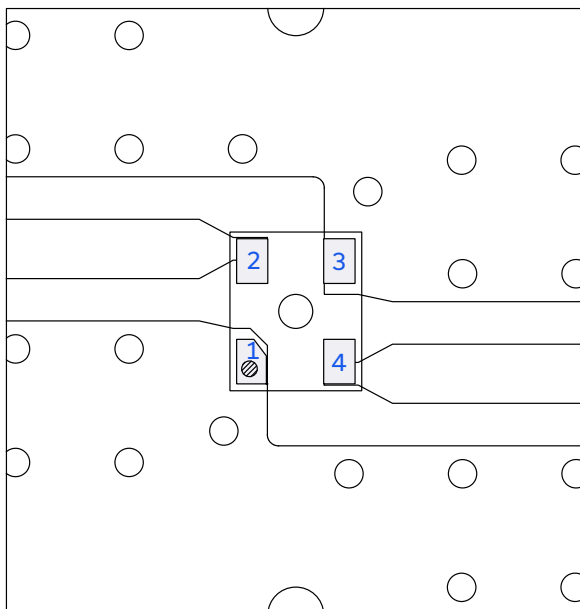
DUT soldered on Mini-Circuits Characterization Test Board: TB-TAV1-331NMC+
